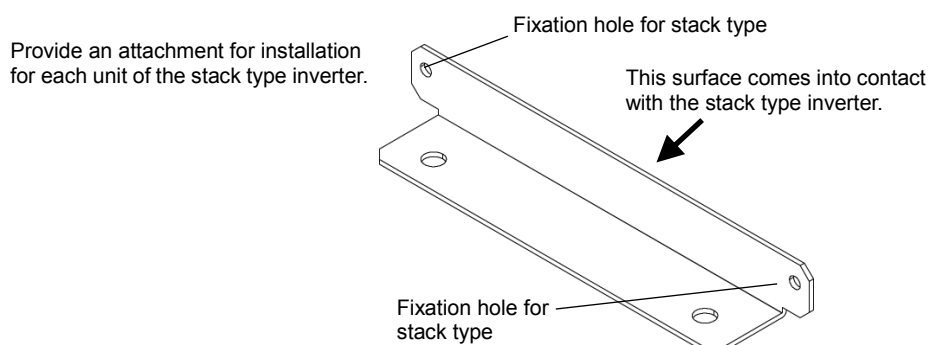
Attachment for fixing lower section (recommended)
